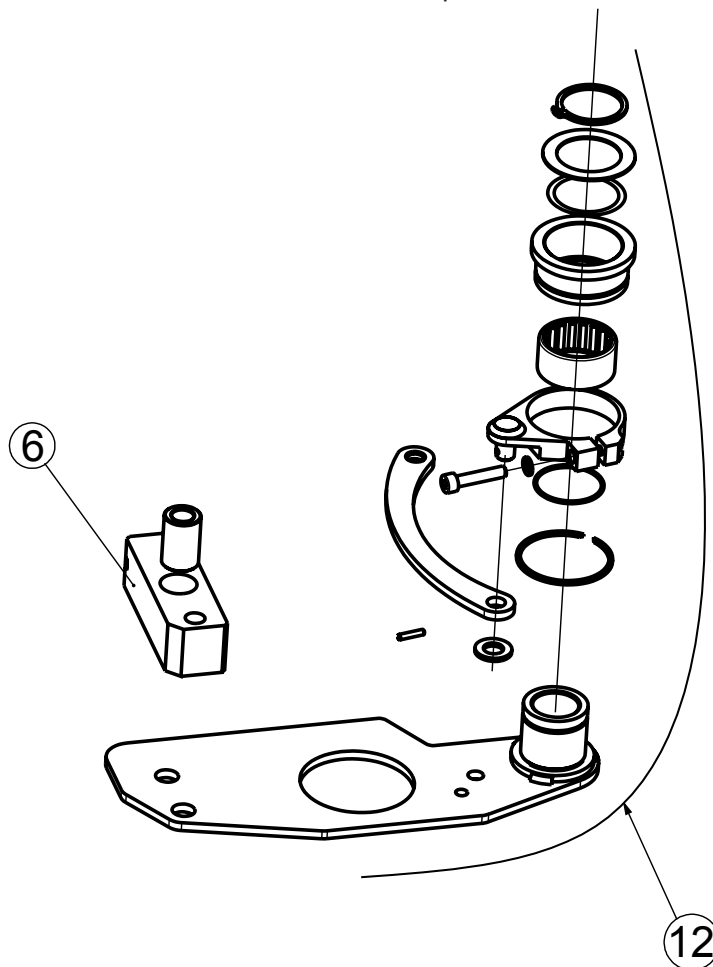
Exploded view of free wheel kit and fixed cam / 45K caliper
